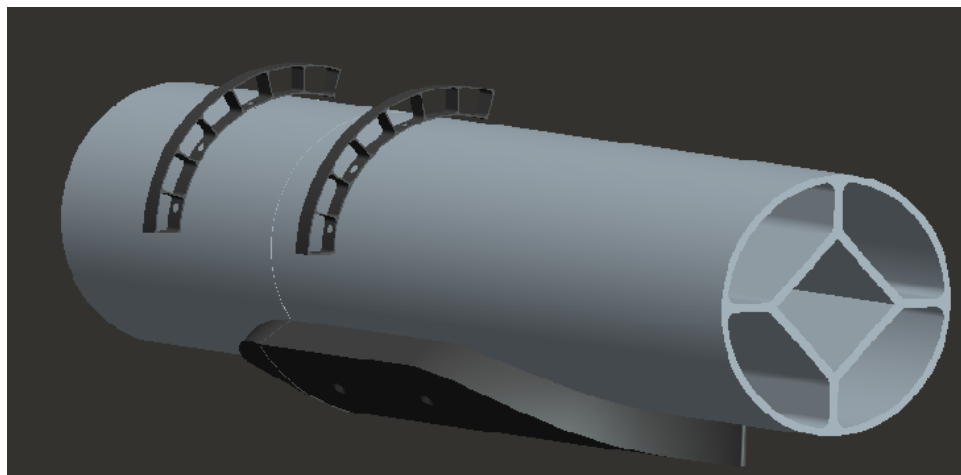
Oblique CAD view of the Attachment of Crane Beams to the Engine Baseline Model
